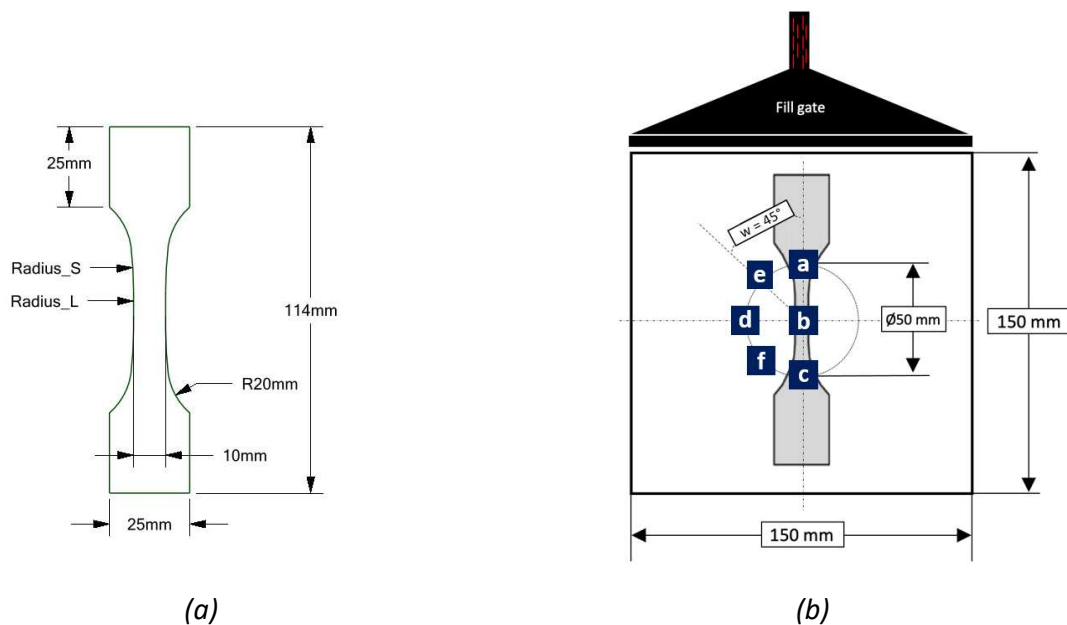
Specimen dimension(a). Mold plaque dimensions and cutting sample orientation (b).
